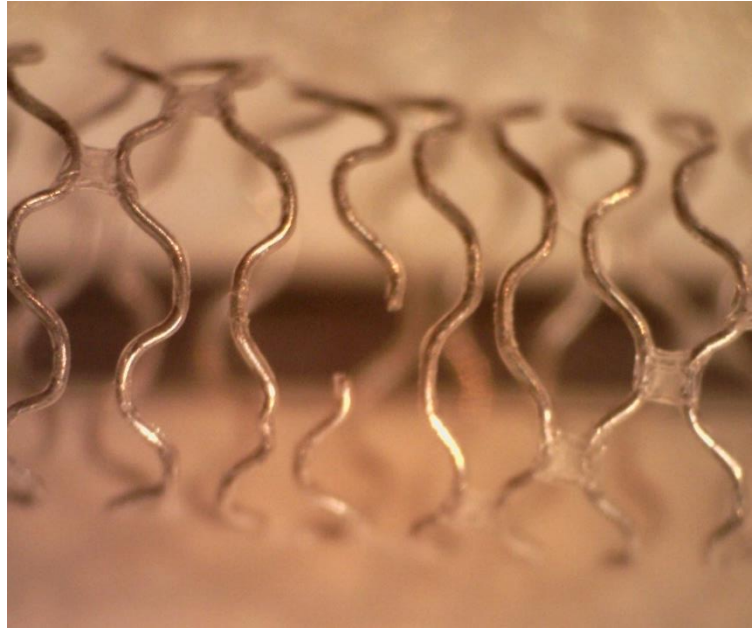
Fracture in 0.5Y devices expanded to 4mm from a crimped ID of 1mm
